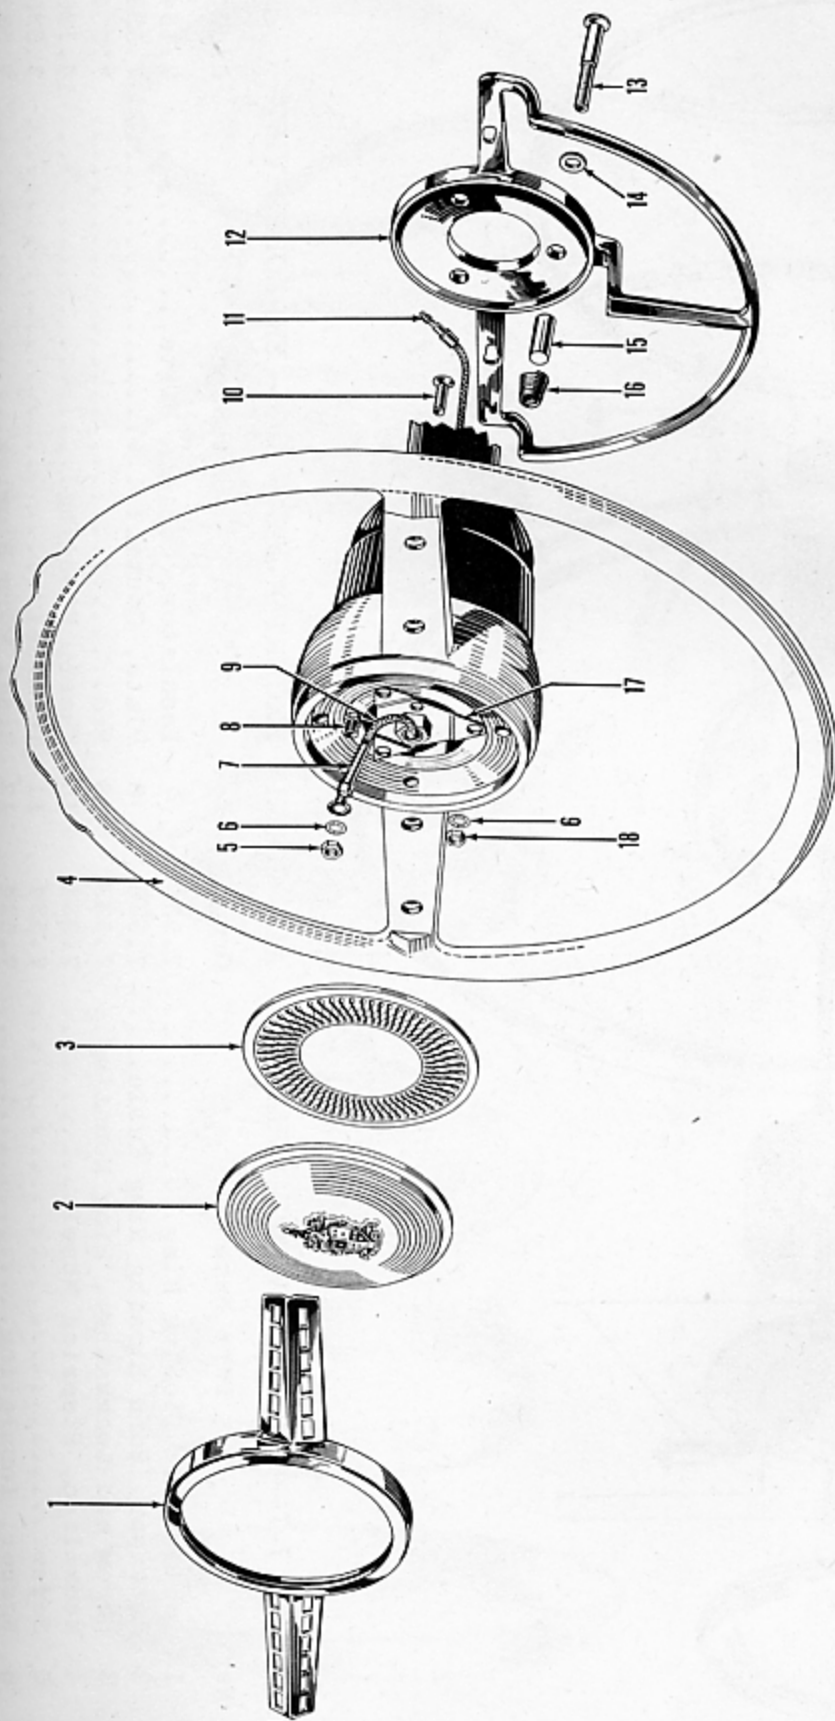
HORN BLOWING MECHANISM - MODELS F-47C-F486 - EXPLODED VIEW
